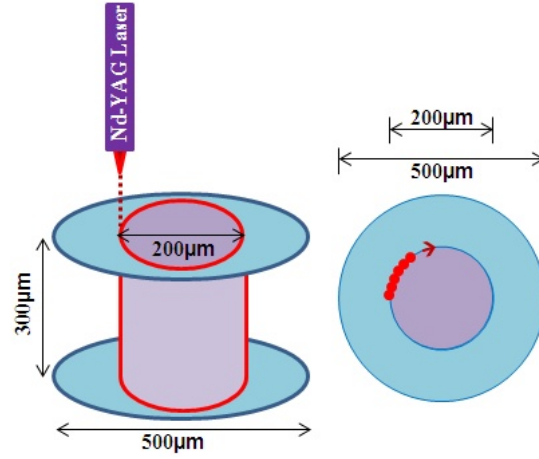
Through hole drilling process by laser trepanning method: Side view (left), top view (right)
